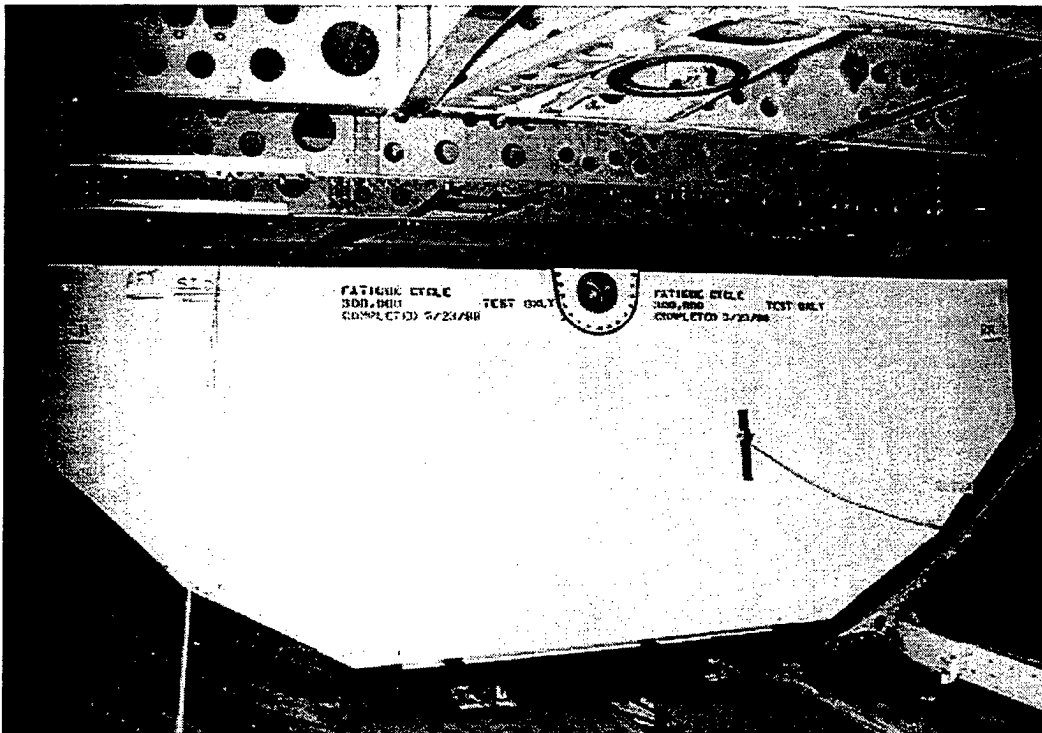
POSTTEST AUXILIARY FUEL TANK REAR VIEW
